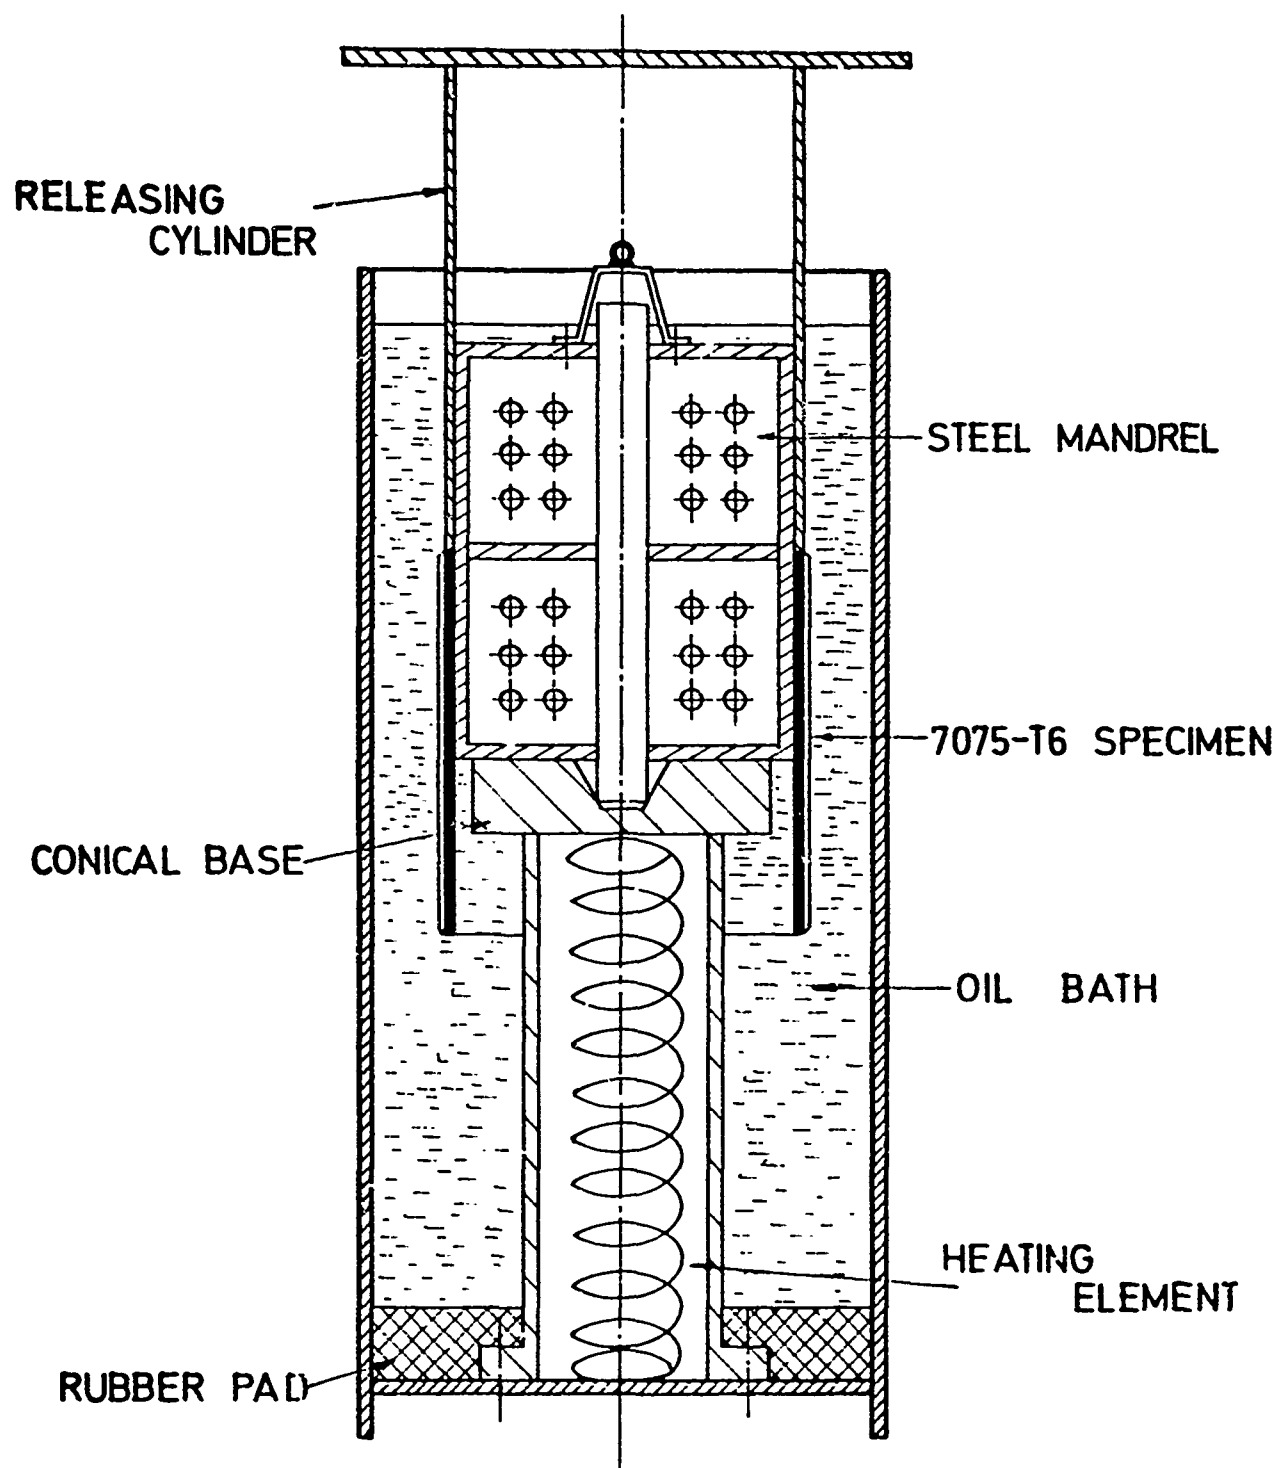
SET-UP FOR RELEASING OF 7075-T6 SPECIMENS
